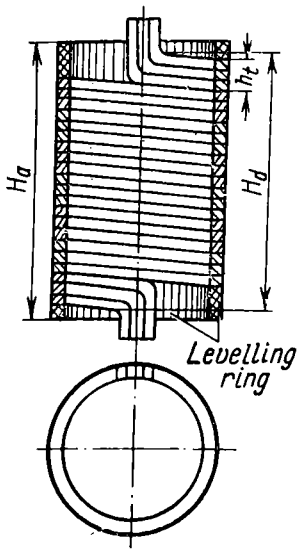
Sectional view of cylindrical layer winding. Position of levelling ring
